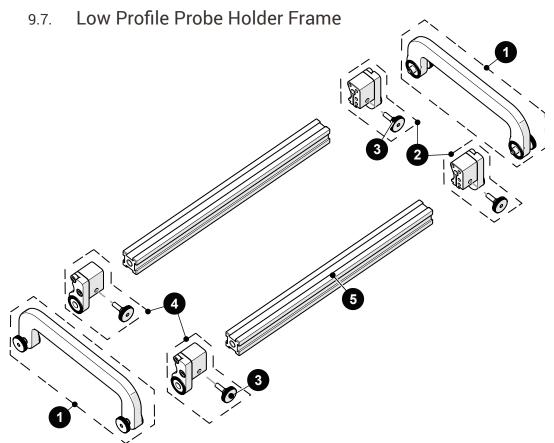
$HydroFORM^{TM}$ probe holder parts
